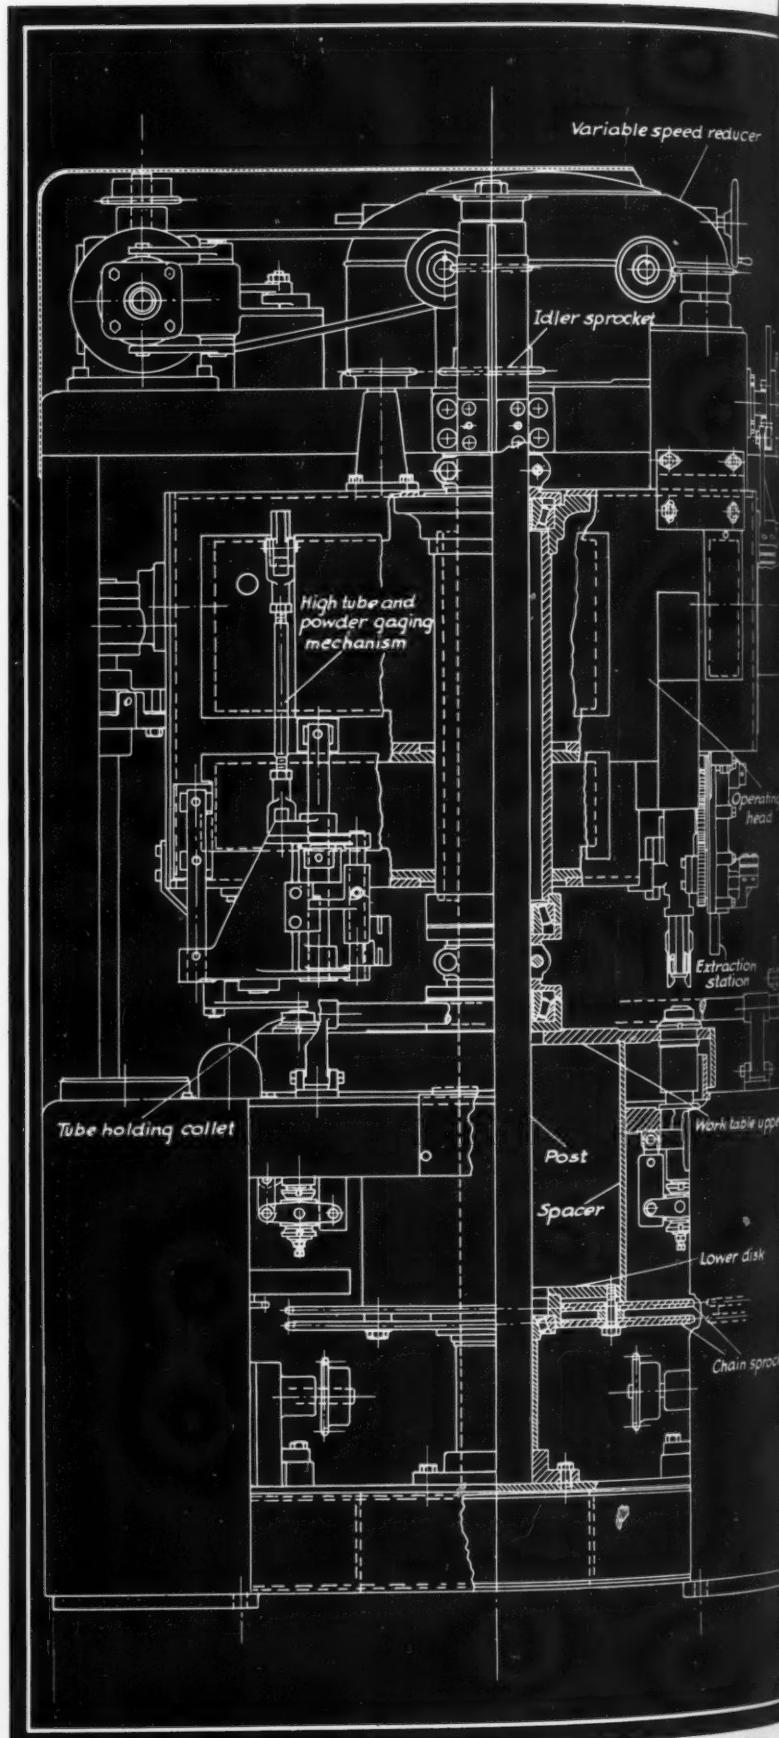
Front elevation in part section shows principal working parts of the machine, including rotating work table, operating-station head and main drive from variable-speed reducer
